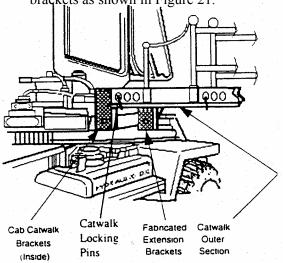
Begin Installation by Attaching Extension Brackets and then Catwalk Outer Section to Crane Extension Brackets.
